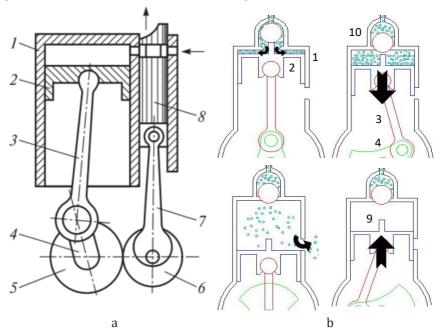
Design of piston pneumatic motor: a – with a spool valve; b – with ball valve.
